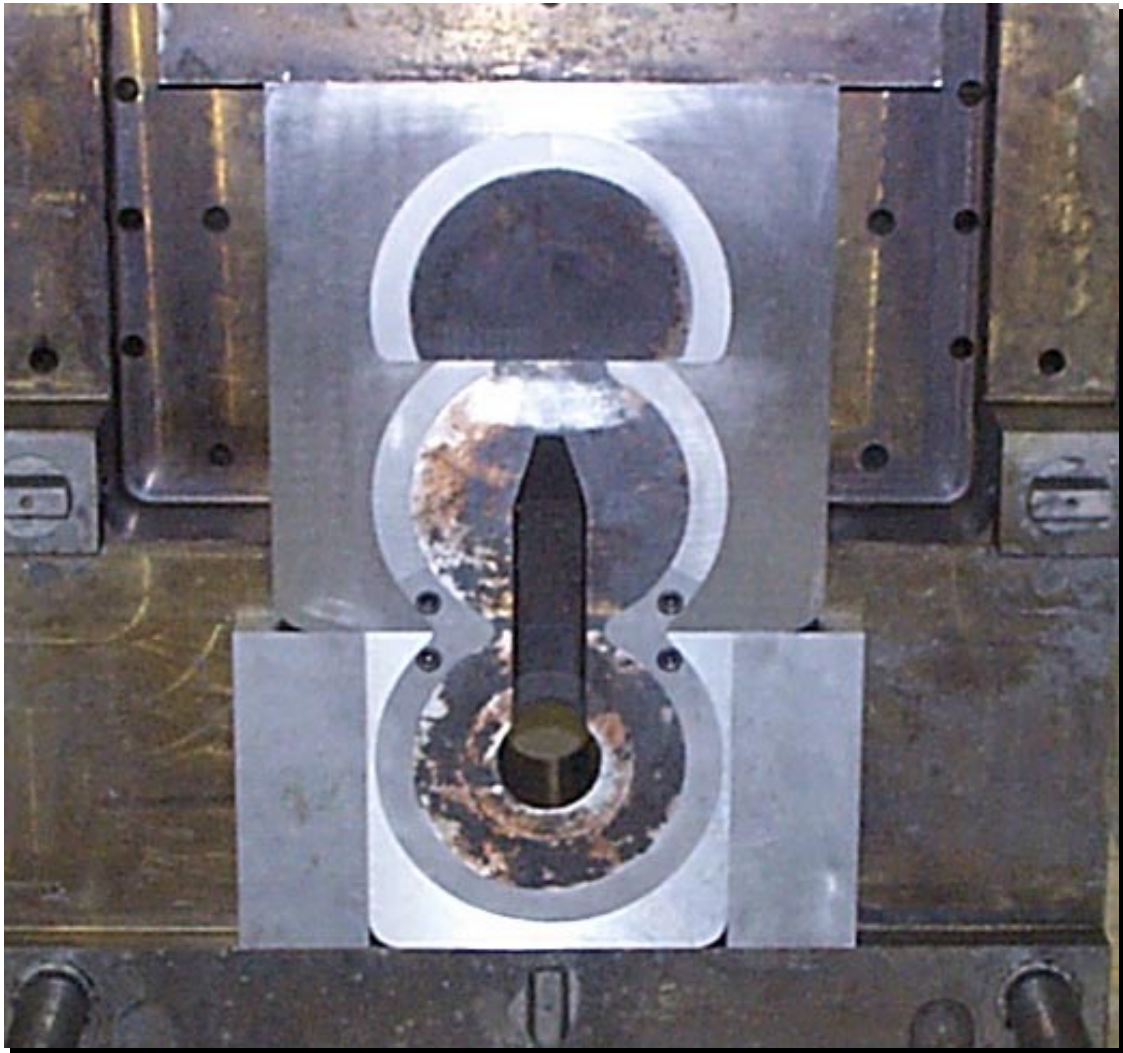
The H-13 steel test cavity tool set after the first several shots.
